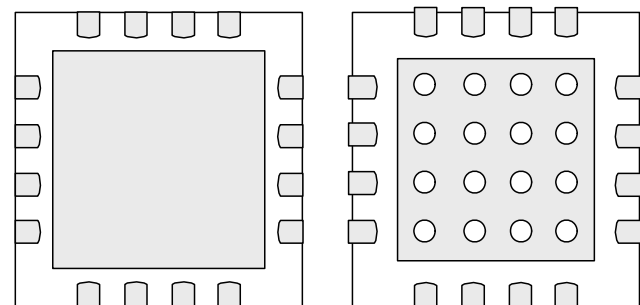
PC Board Land Pattern Geometry for MLP Terminals
